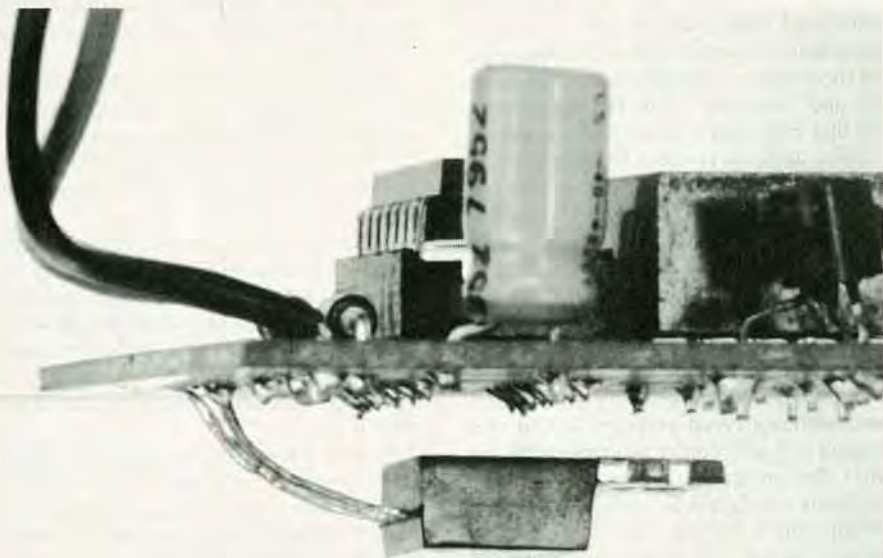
THE FIVE-VOLT regulator is mounted on the bottom of the PC board, exactly as shown.
